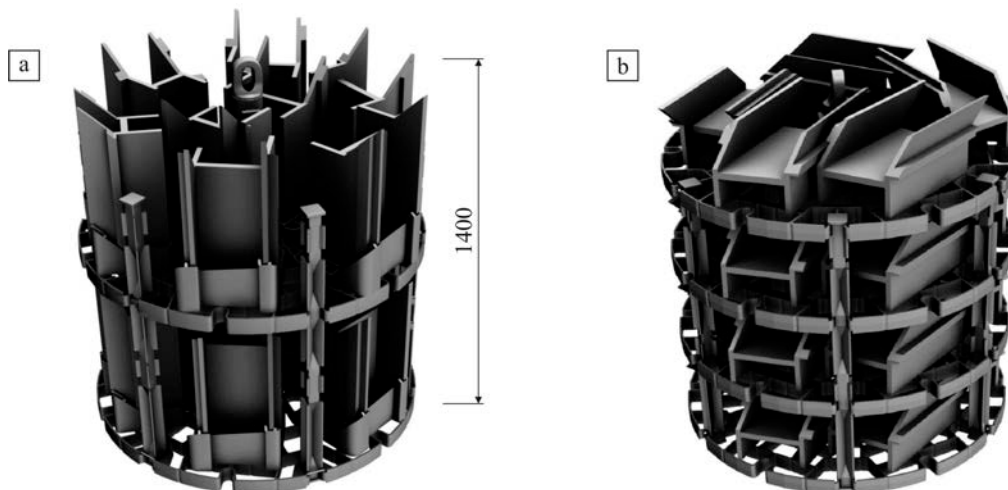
The equipment for the heat treatment of turbojet engine gas guide vanes [9]: a) initial design, b) modified design
